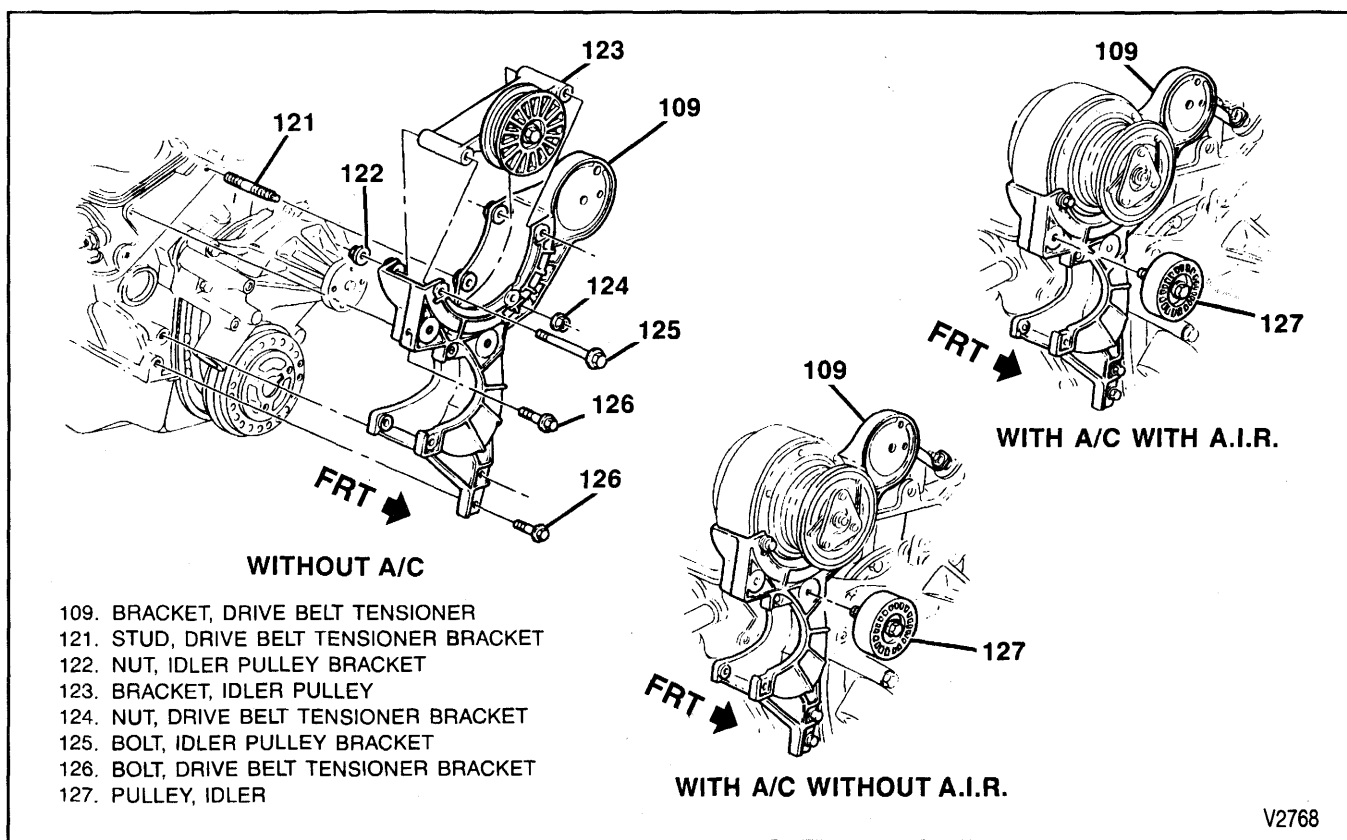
Idler Pulley and Bracket (4.3L, 5.0L, and 5.7L Engines)
